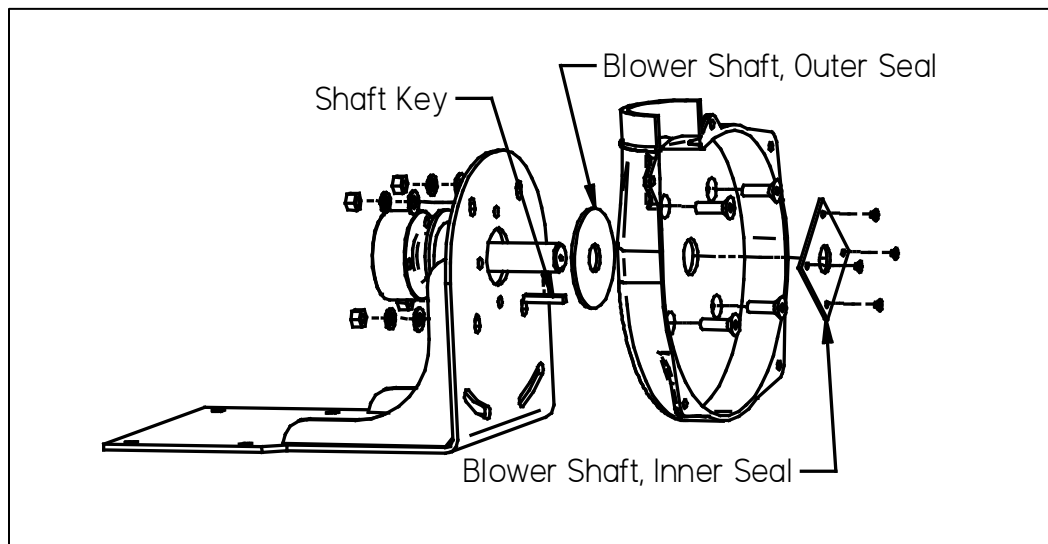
Shaft Seals and Keyway for Kit 31496K
